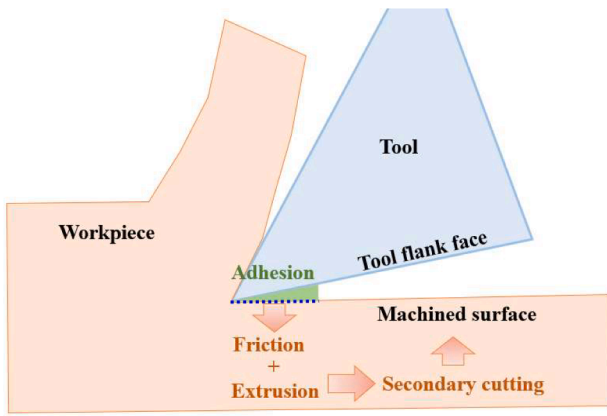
The extrusion and friction between the tool-workpiece interface.
